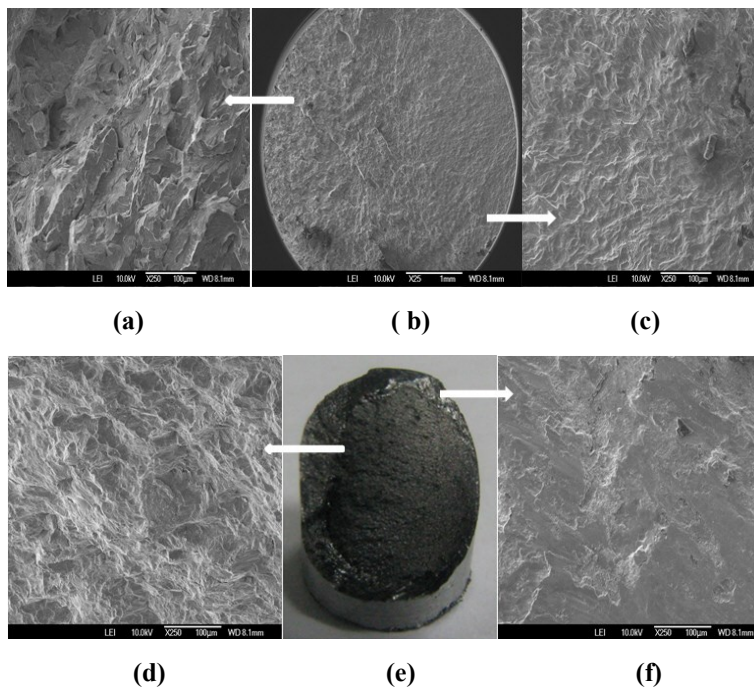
Fatigue Fracture Surfaces of (a), (b) and (c) Uniaxial Specimen at $\Delta\sigma/2 = 421$ MPa and (d), (e) and (f) Torsion Specimen at $\Delta\tau/2 = 300$ MPa.
